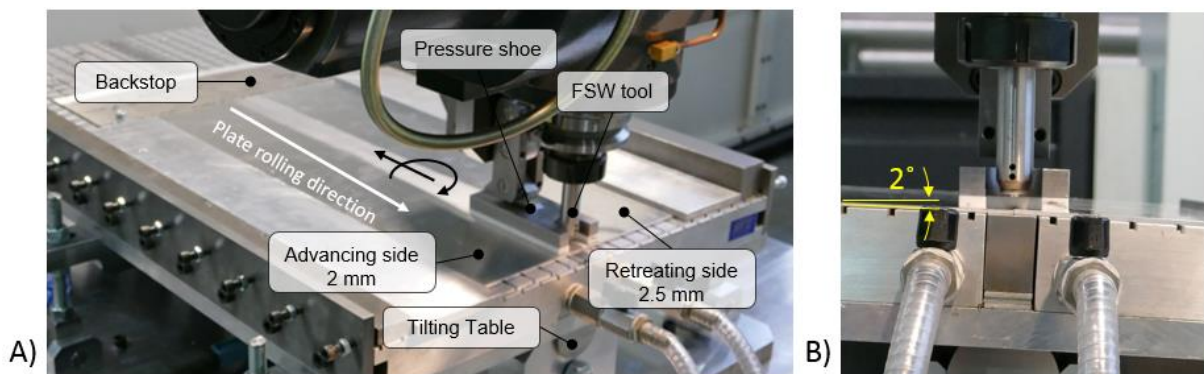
Welding setup for the 2 to 2.5 mm thickness combination combination A) general view and B) detail of FSW tool (Courtesy of TWI, Ltd).
